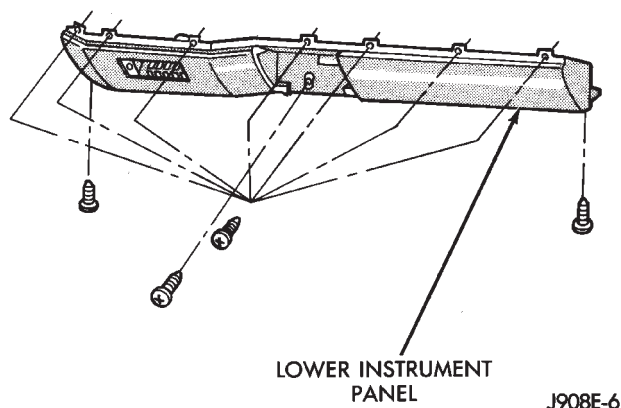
Lower Instrument Panel/Knee Blocker Remove/Install
